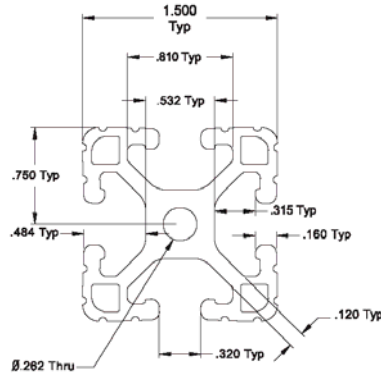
A cross sectional view of the 8020 extruded aluminum pieces that we will use to build the casing.
